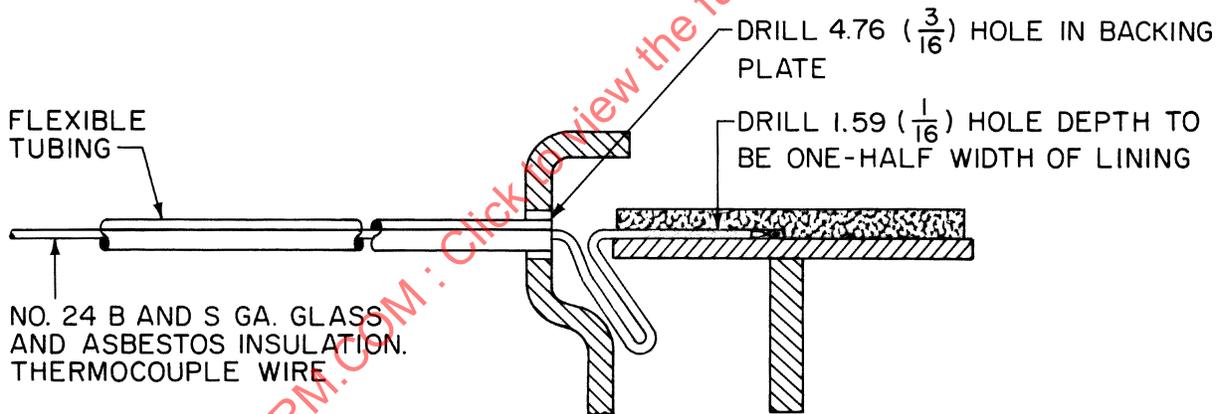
A—DRAWING OF THERMOCOUPLE LOCATION—DRUM BRAKE
